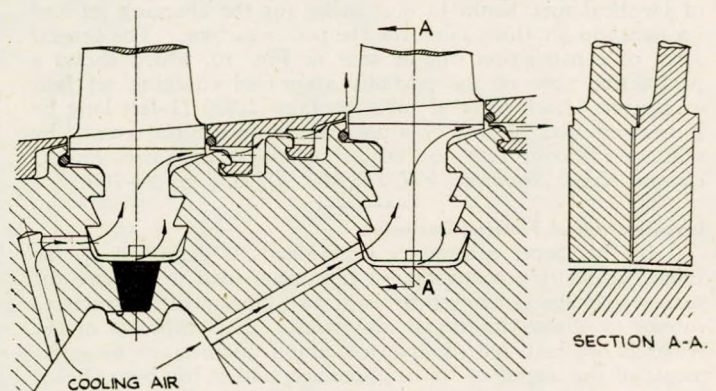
Section showing the path of the rotor cooling air and the weld between two rotor sections
